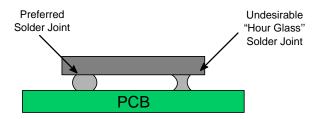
Side View of DFN Illustrating Preferred and Undesirable Solder Joints
